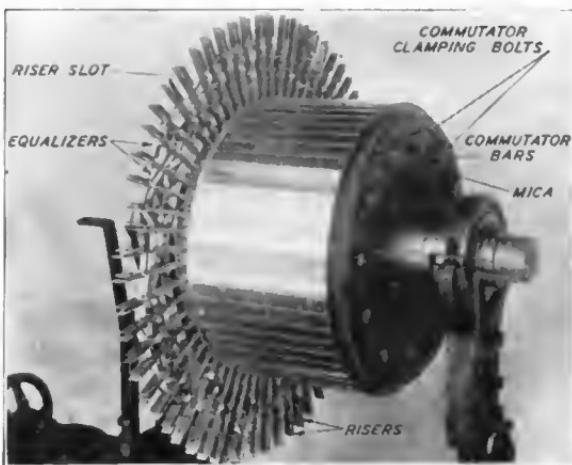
Commutator Assembly Ready for Test on Dynamic Balancing Machine
